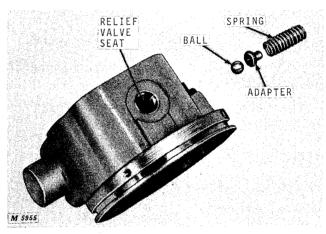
Relief Valve Adapter, Ball, Spring and Seat
